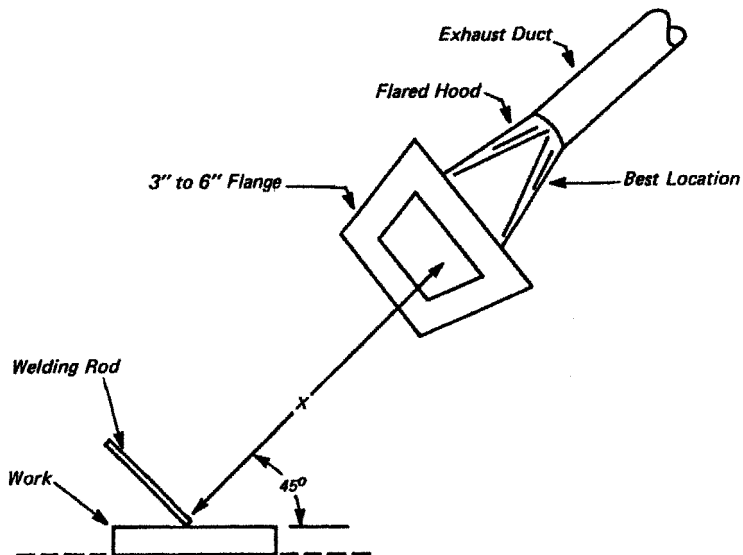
Movable welding hood, an example of an exterior hood. [After Hagopian and Bastress (1976).]
